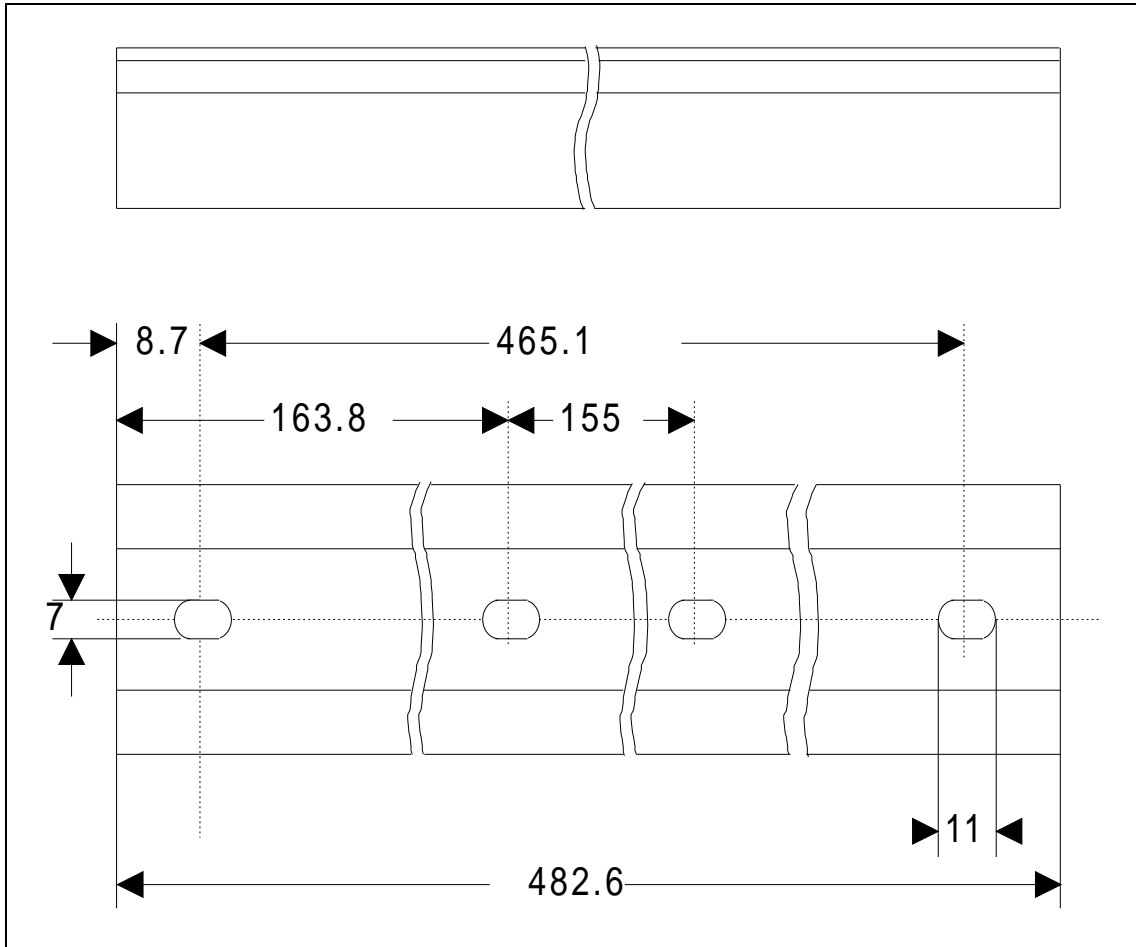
Dimension Drawing of the 483 mm (19") Standard Sectional Rail
